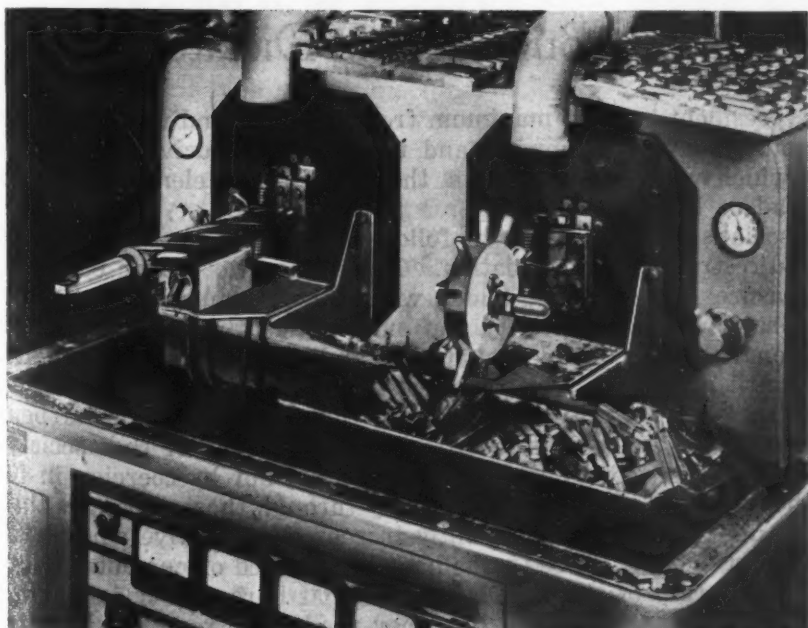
Two Brazing Operations can be Performed Simultaneously on This Two-station Tocco Induction Heating Unit. A Large-diameter Drill, Held on a Magnetic Chuck, is being Brazed at the Left
